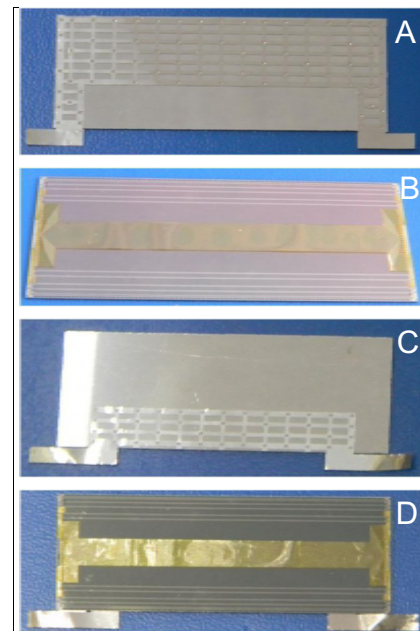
Evolution of the assembly of a composite sensor. A: sensor 1 with the bonded back contact; B: sensor 2 with the bonded interstrip cable; C: sensor 2 with the bonded back contact; D: a mock-up of the assembled double-sided sensor.
